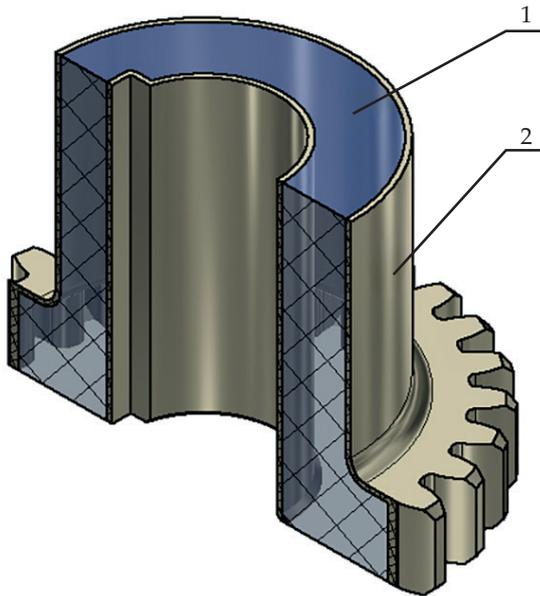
Part of a gear clutch made by layered extrusion and low-pressure casting: 1 – filling with chemically cured resin, 2 – thin-walled element
